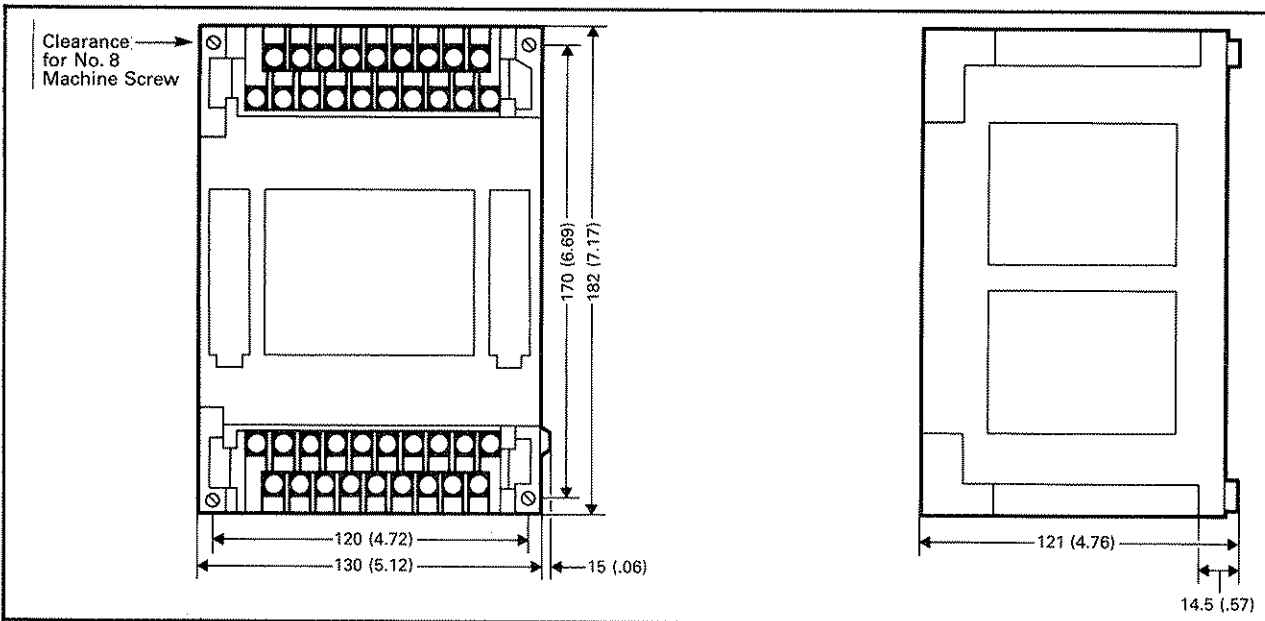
External Dimensions for PC-110 in mm (in.)
